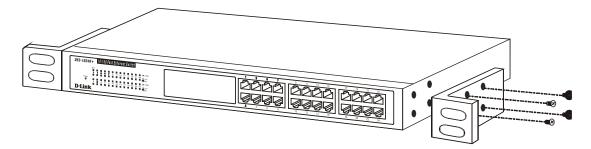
Attaching the mounting brackets to the 10/100 Fast Ethernet Switch
